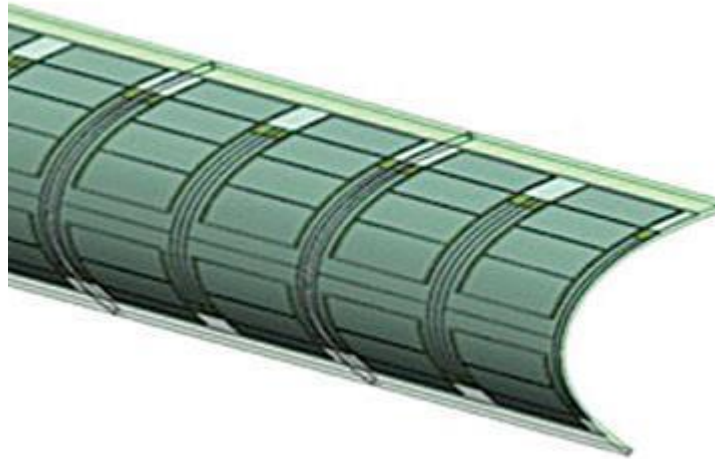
GKN leading edge heating element for the Boeing 787 [124]
